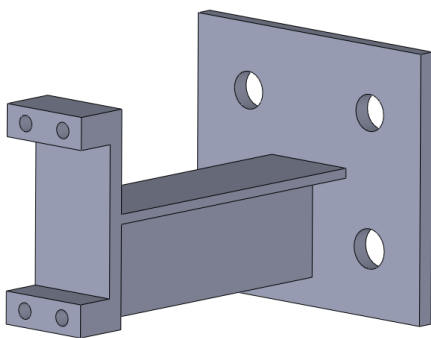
3D MODEL OF THE TOP CYLINDER MOUNT USED IN THE QUADRO-CAGE-CLAMP.
